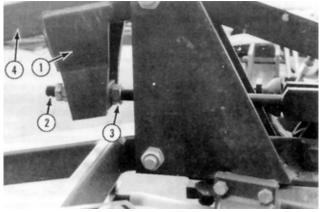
Wing Gauge Wheel Adjustment Rod: (1) Rod Bracket, (2) Adjusting Rod, (3) Interior Nut and (4) Gauge Wheel Arm.
